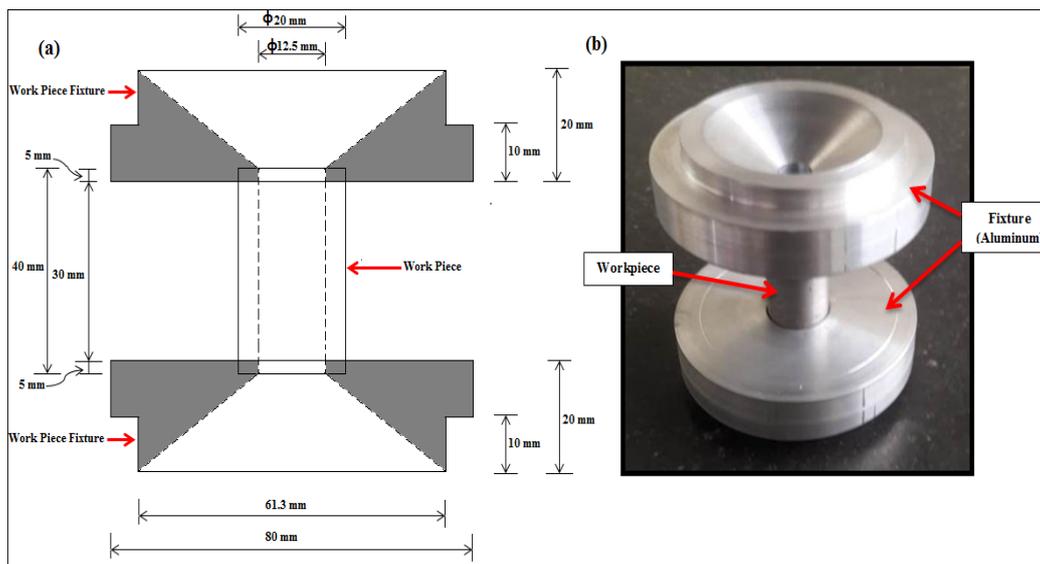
(a) geometrical representation (b) pictorial view of the aluminium fixture.
